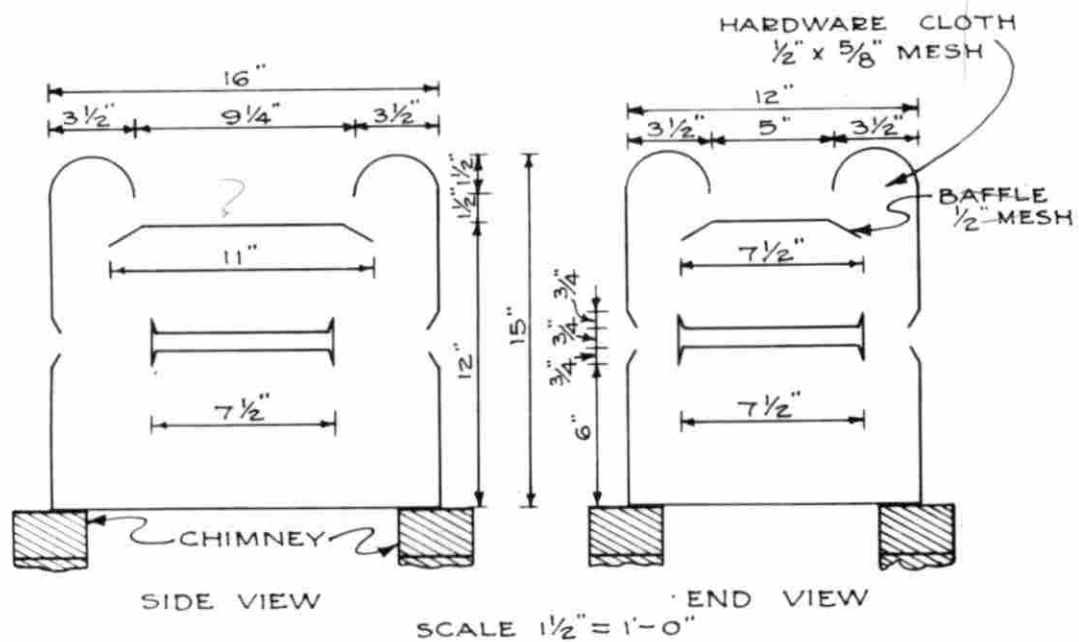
SECTIONAL SKETCH OF NO. 2 SPARK ARRESTER
